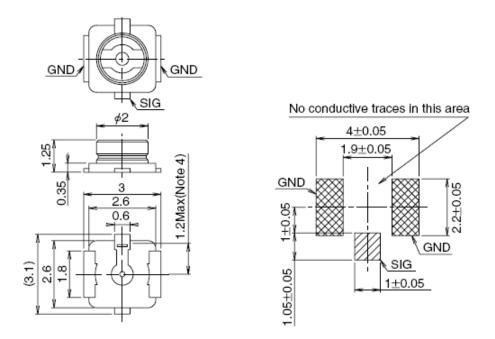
Dimensions of the U.FL-R-SMT Connector (Unit: mm)
